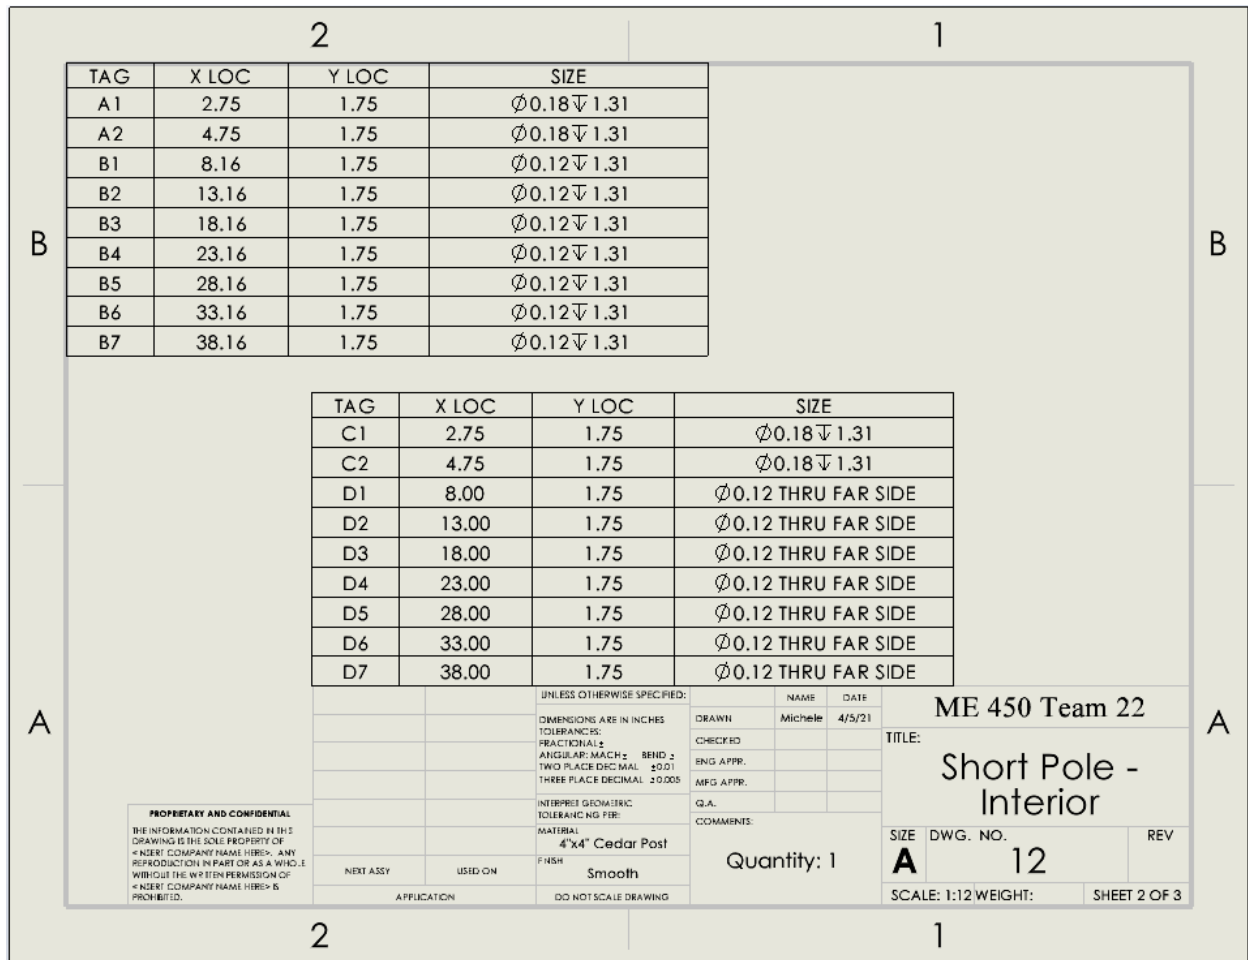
Engineering Drawing of the Short Pole - Interior.
